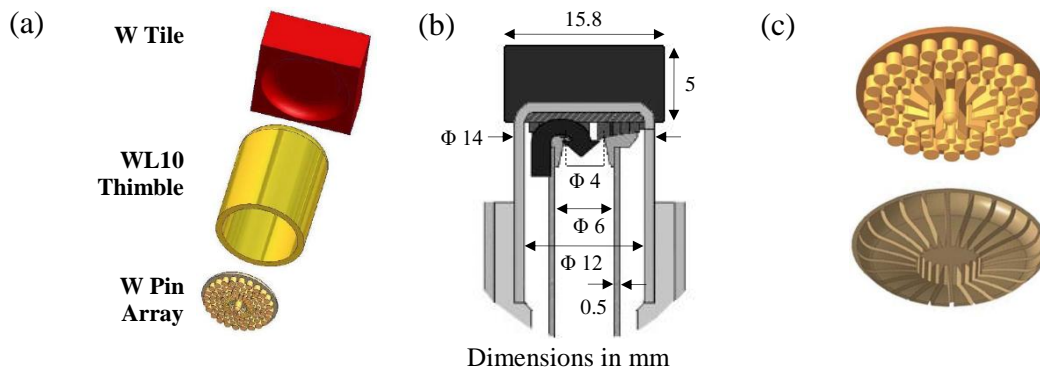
(a) Exploded view of the HEMP module, (b) HEMP cross-section, and (c) rendering of a pin and slot array [77, 78].
